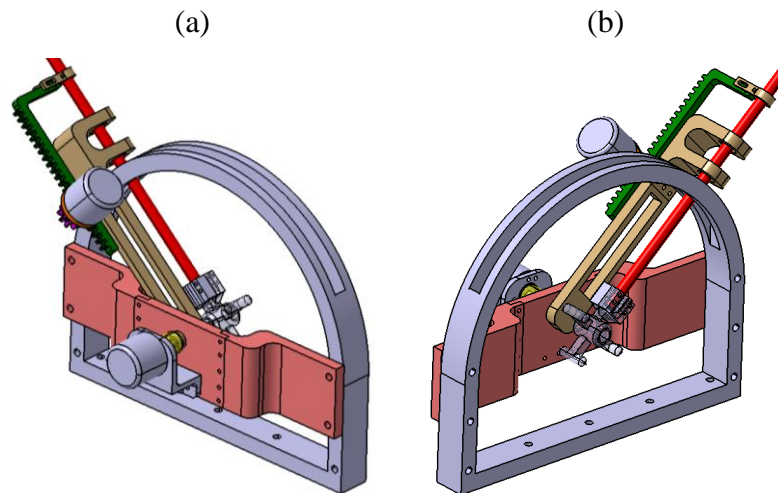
Design and detailed views of the setup; (a) front view, (b) back view.
